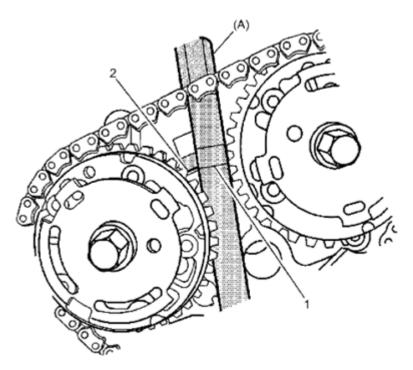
Aligning Groove Of Special Tool And Top Surface Of Cylinder Head Courtesy of SUZUKI OF AMERICA CORP.
